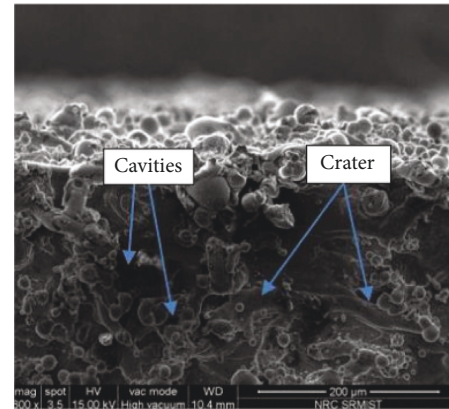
Machined surface using zinc-coated tool with 600x magnification.
